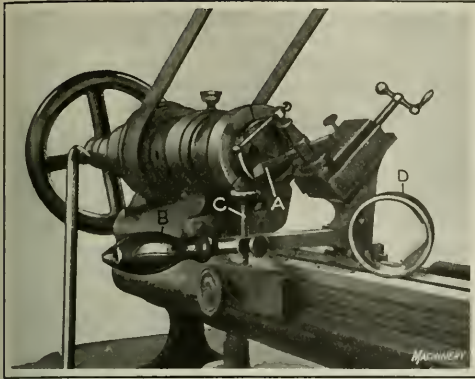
Set-up employed for threading the Bezel Case of a Dial Gage on a Bench Lathe
